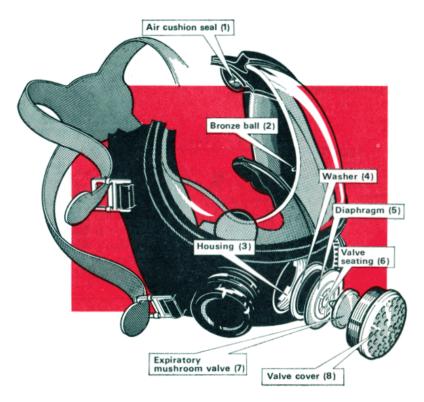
Draeger/Normalair face mask showing air-cushion seal and the expiratory valve/speech transmitter
